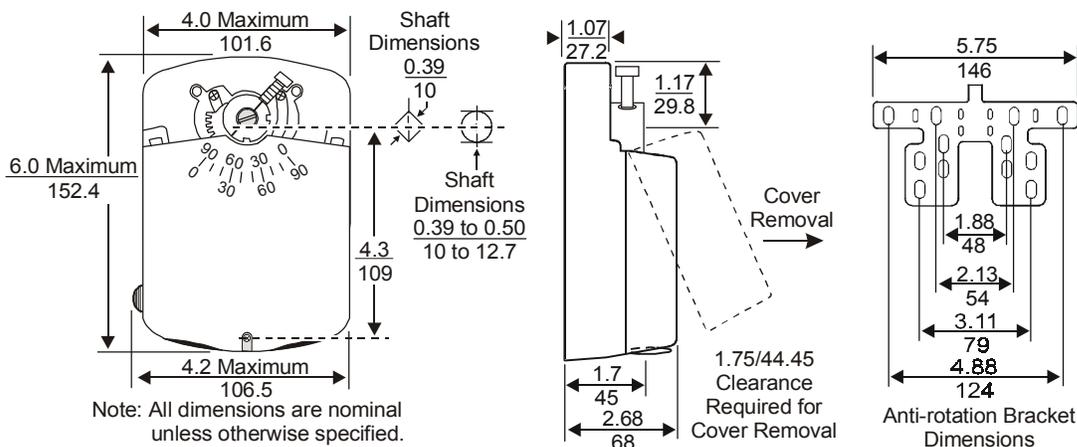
Actuator and Anti-rotation Bracket Dimensions, in. (mm)
